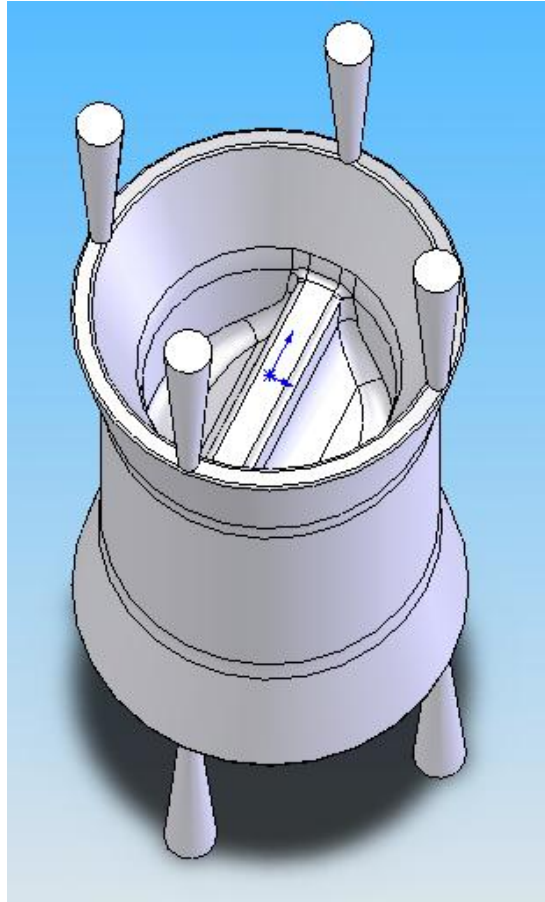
Isometric view of valve die, with gates added to inlet and outlet to facilitate injection molding.
